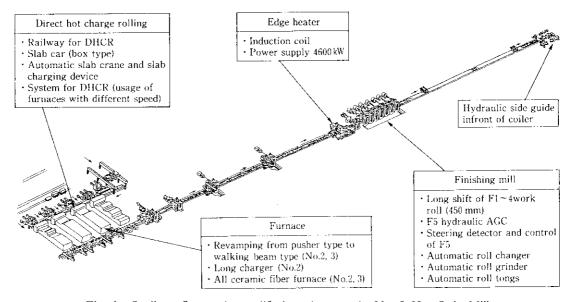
Outline of recently modified equipments in No. 2 Hot Strip Mill
